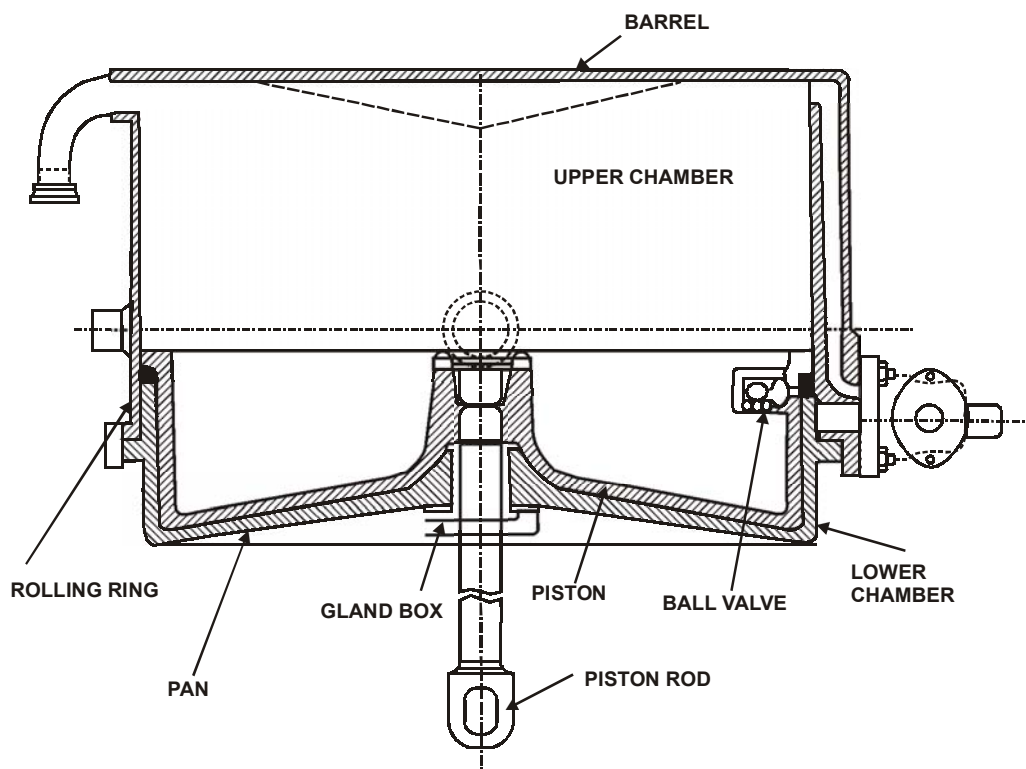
VACUUM BRAKE CYLINDER ("F" TYPE)
